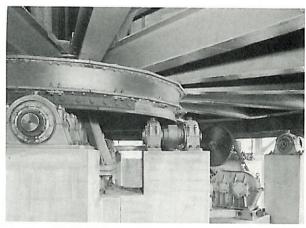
6" Jones Pillow Blocks on Roll Shafts Supporting Cooling Table. Table Driven by a Jones Triple Reduction Herringbone Gear Speed Reducer.
